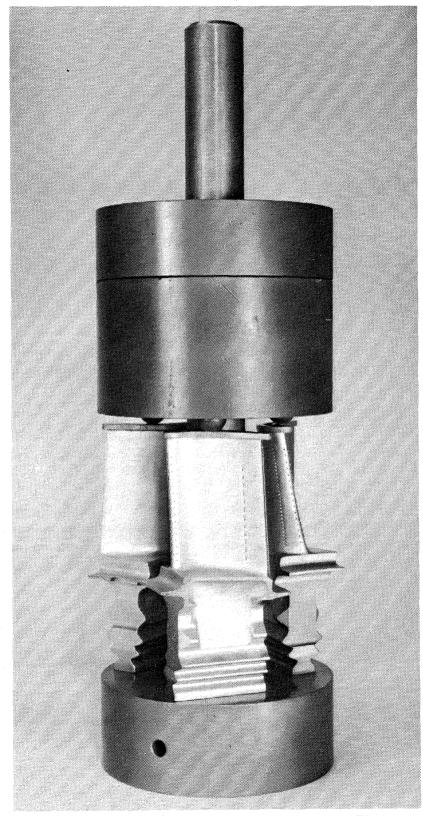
Blade/Tip Assembly in Bonding Fixture Proir to Furnace Bonding.
